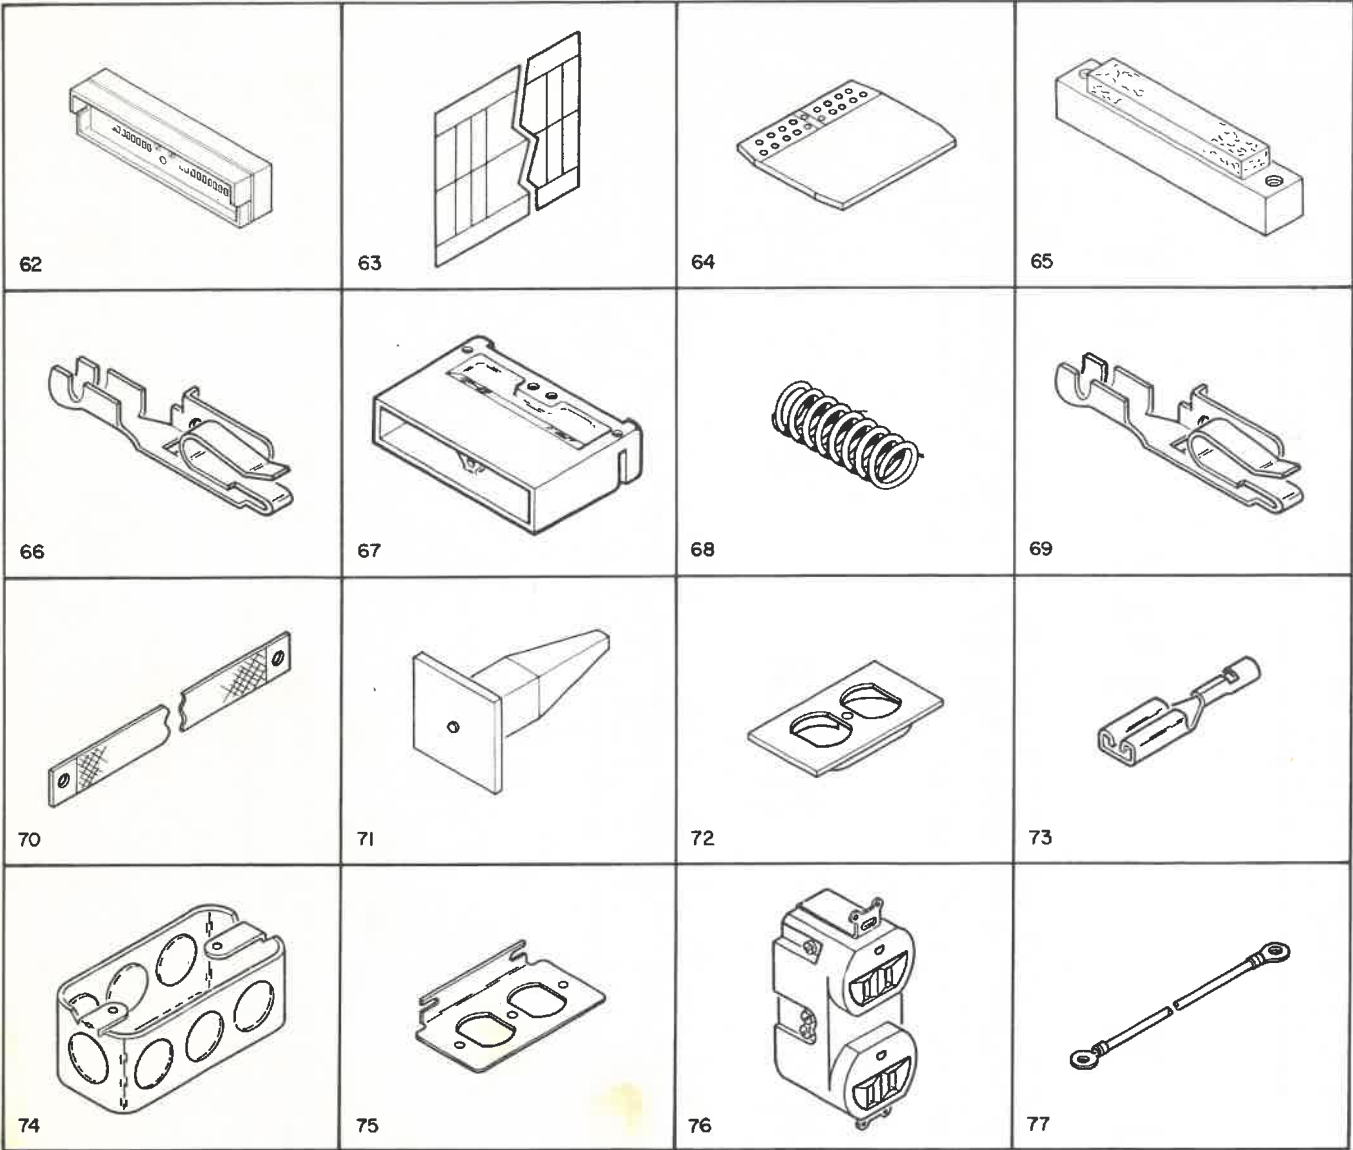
CABLE AND JUMPER ASSEMBLY COMPONENT PARTS. SHEET 3 OF 3. INDEX NOS. 62-77. SEE LIST 12.
